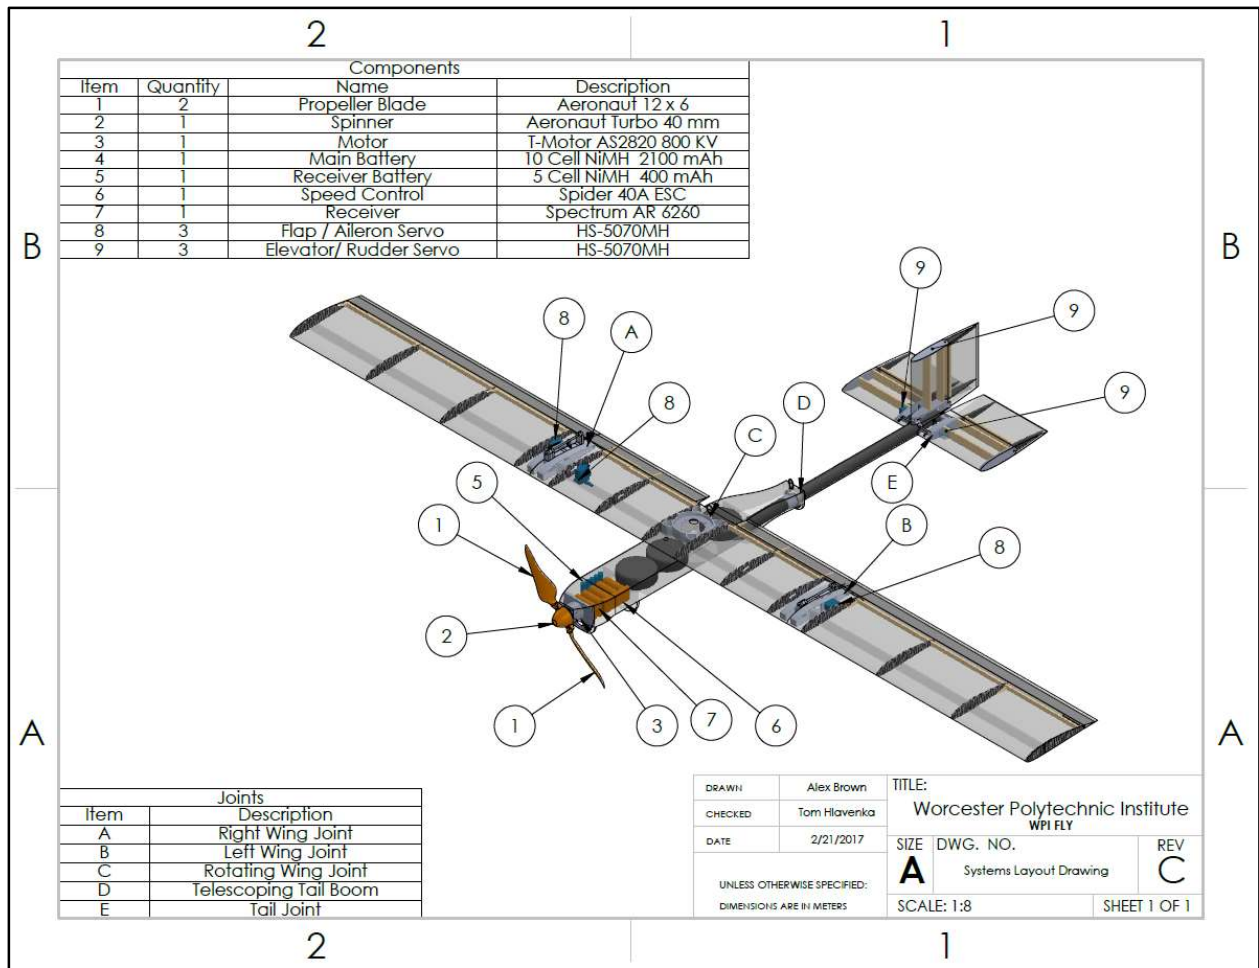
SYSTEMS LAYOUT CAD MODEL
